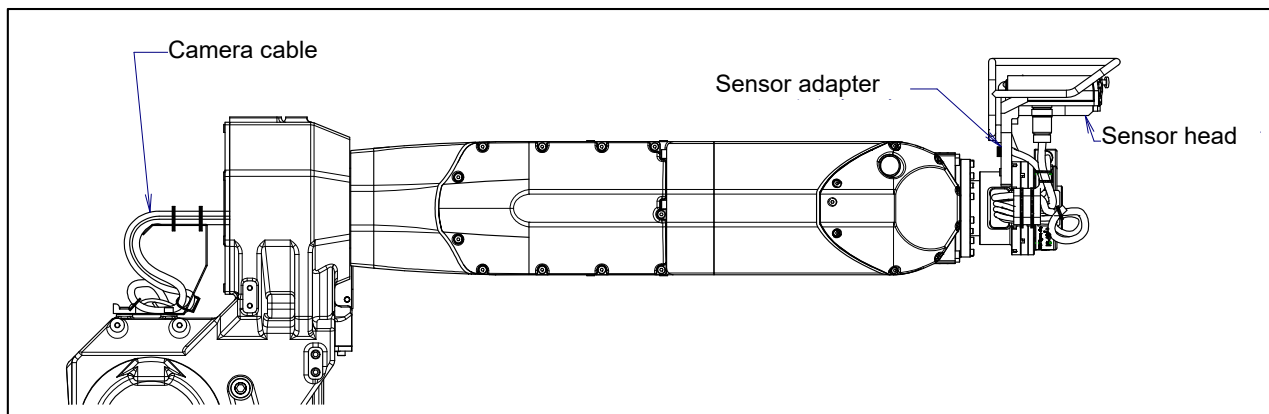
(a) Replacing the 3D Laser Vision Sensor head (Example of M-20iA)
